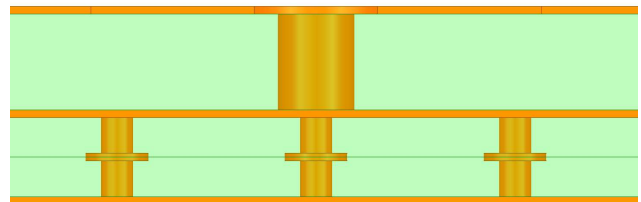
Schematics of the complete system with the embedded & antenna module mounted to the system board.
